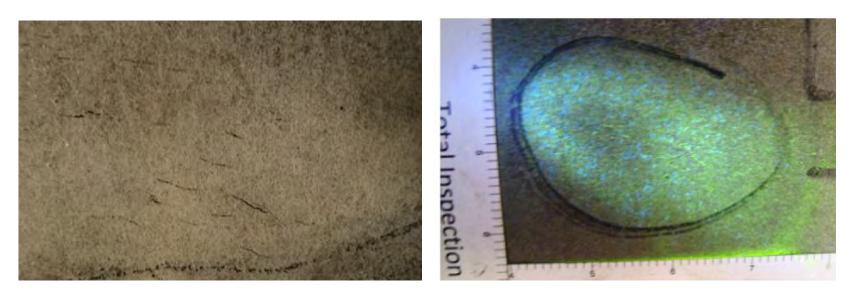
Photographs, provided from Digs RWVC 36-13(Left) and RWVIM 101-13 (Right), showing representative colonies of linear indications identified using magnetic particle inspection.
